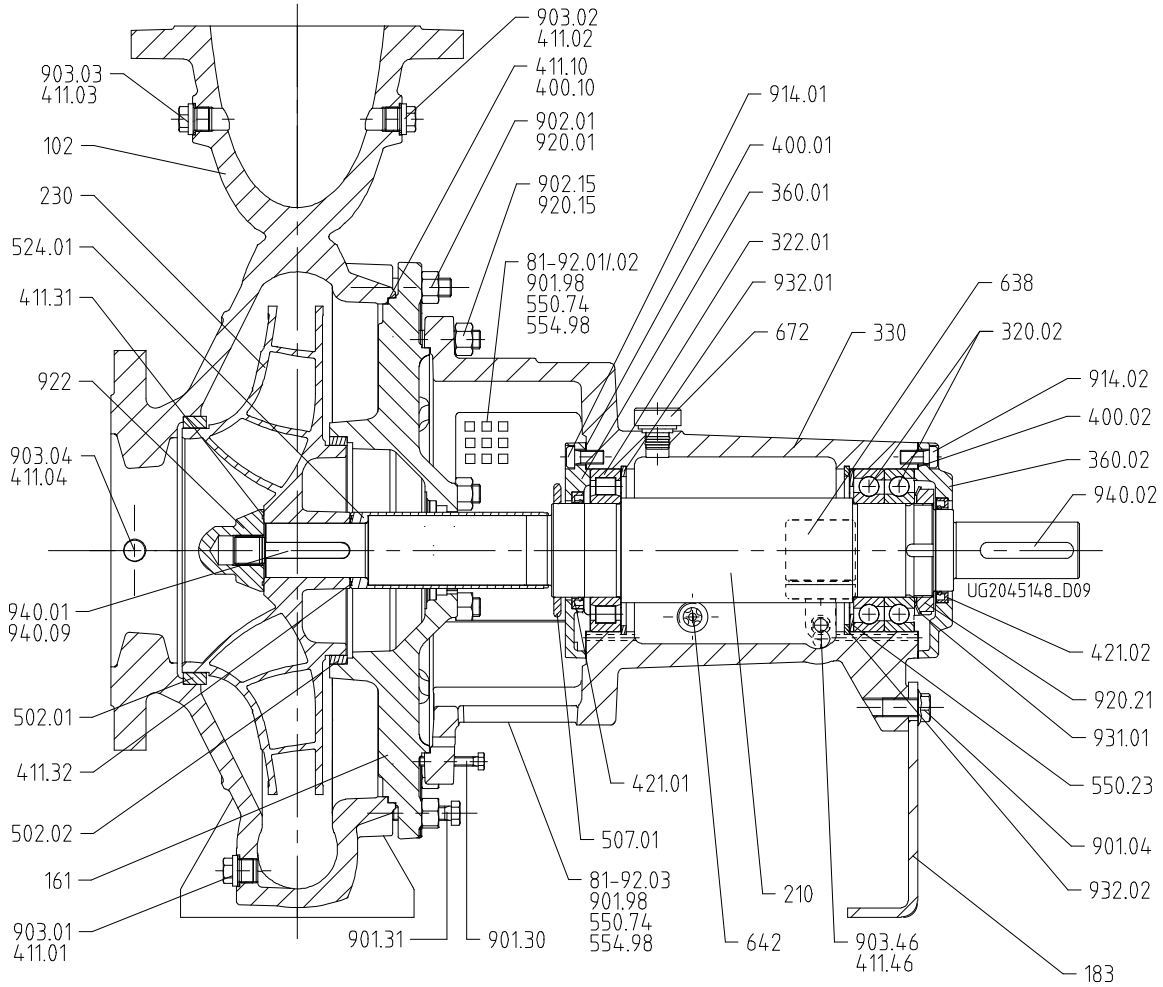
General assembly drawing of standard version (oil-lubricated)
